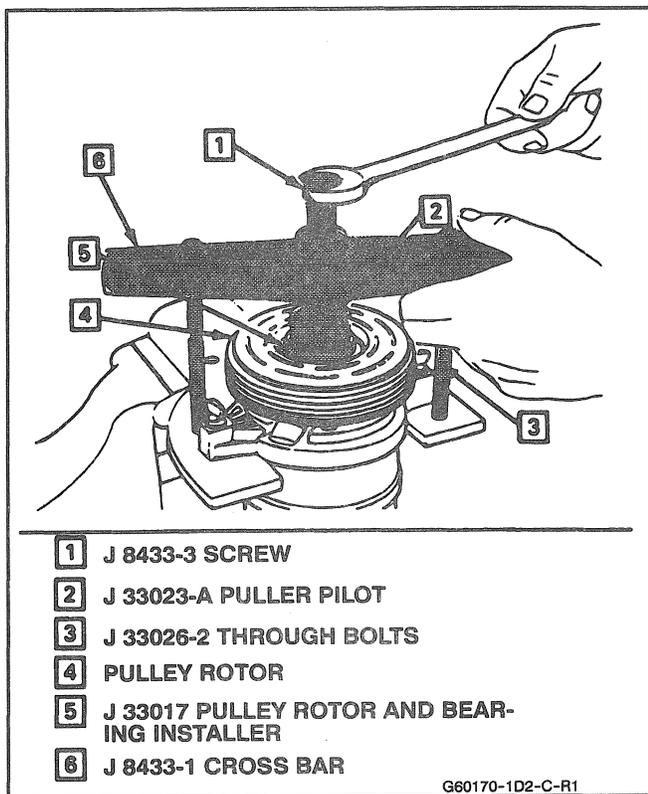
Installing Pulley Rotor and Bearing Assembly
